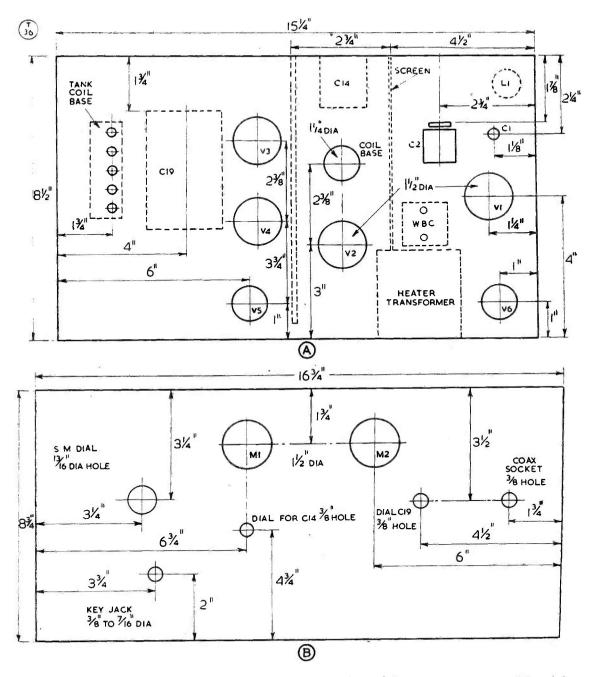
Layout and drilling details for the chassis (section A) and the panel (section B). The design and placement of parts have been carefully worked out.
